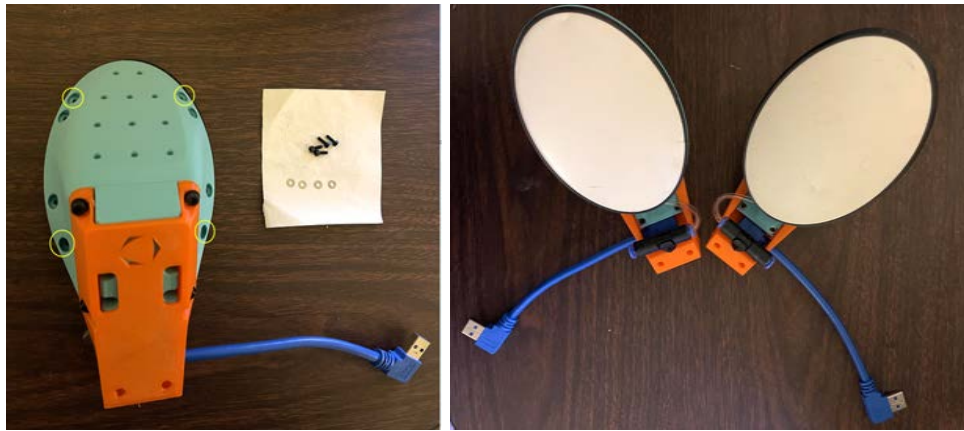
Bubble modules mounted onto Bubble\_Gripper\_Body.
